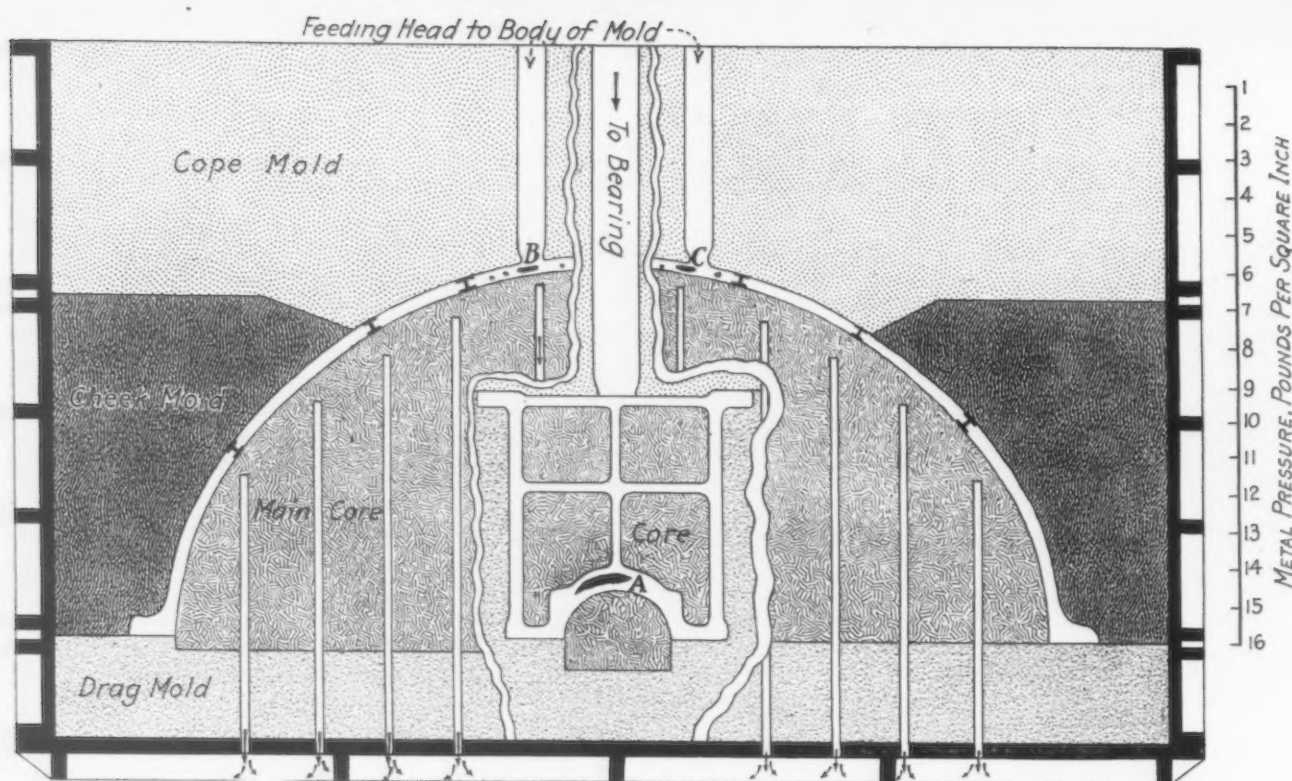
Former Method of Casting Casing for Steam Turbine, with Flange Downward. Defects shown at A, B and C were caused by having insufficient metal pressure above the points indicated. Formation of defects at B and C was furthered by gases from the vents, working upward instead of downward, as intended
